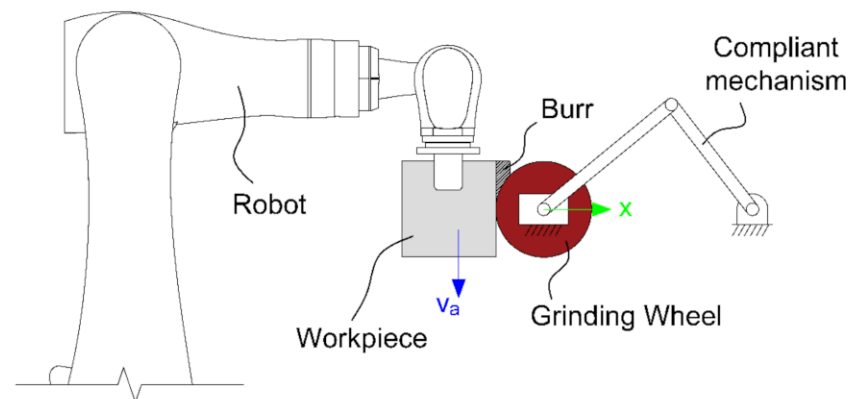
System configuration: the robot holds the workpiece whilst the compliant mechanism holds the grinding wheel.
